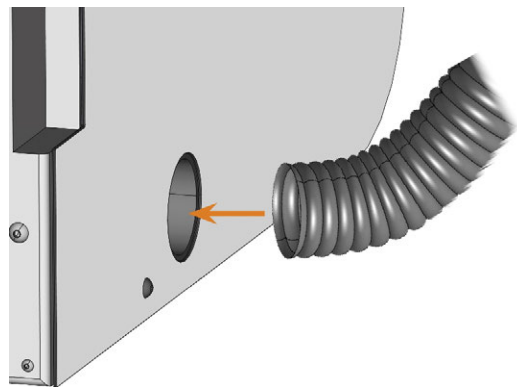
INSERTING THE SUCTION HOSE INTO THE MACHINE
